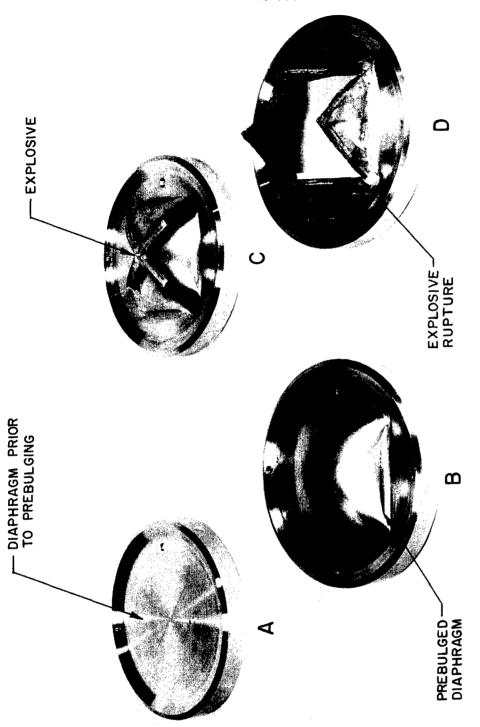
STEPS IN THE FABRICATION OF THE EXPLOSIVE HIGH PRESSURE RELEAVE.
